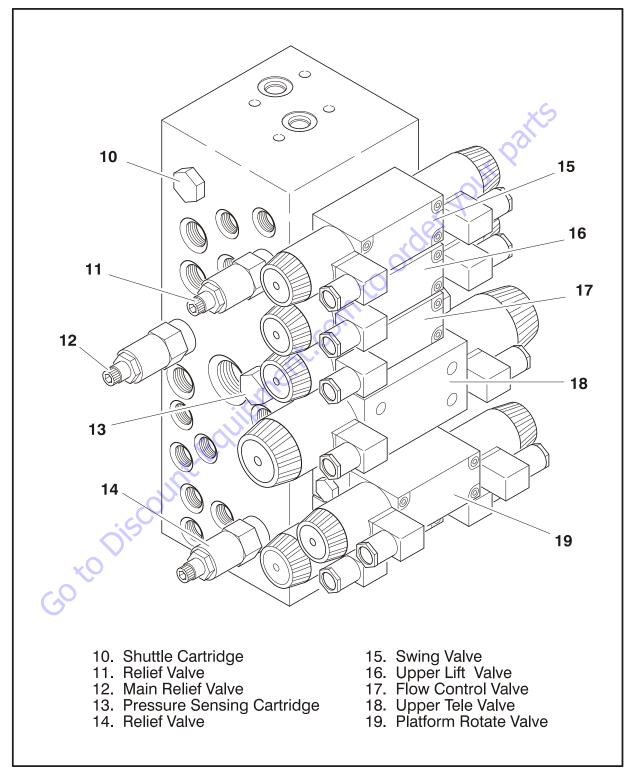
Location of Components - Main Control Valve (Sheet 2 of 2)
